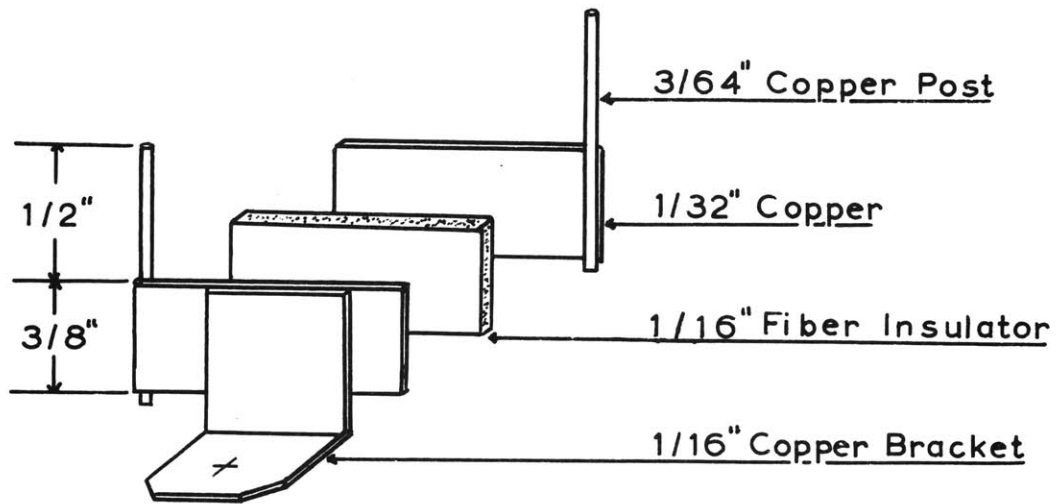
EXPLODED VIEW OF THERMISTOR MOUNT.
